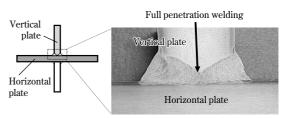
Cross section of T-weld joint of specimen 1
